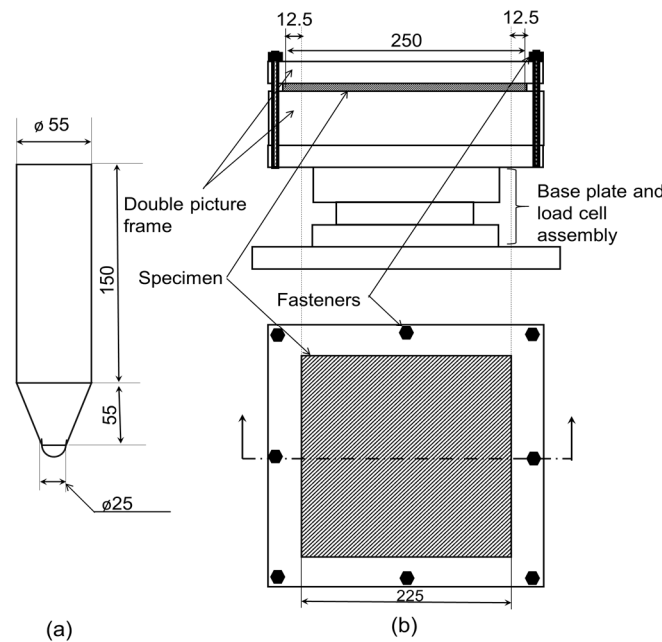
(a) projectile profile and (b) impact fixture setup (all dimensions are in mm).
